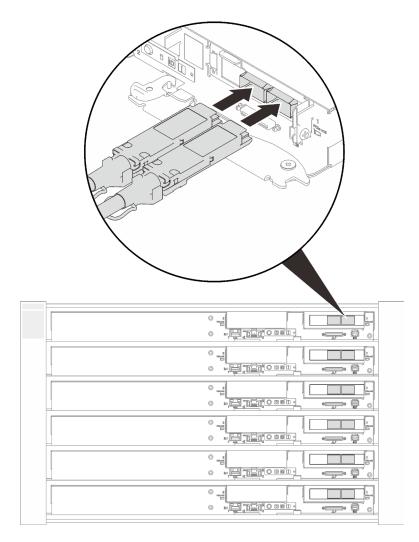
Connecting QSFP cables to SD650-N V2 tray
